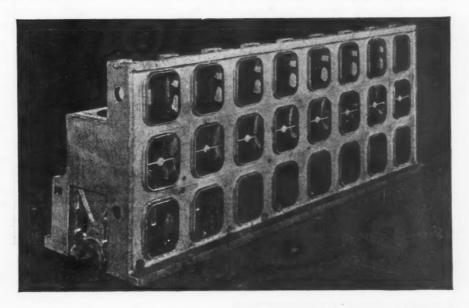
Stiffener Arrangement on Under Side of Machine Bed. By the Use of a Flame-cut Piece at the Center of the Intersection of the Diagonal Members to Obtain Square Joints, Fitting and Welding are Simplified
